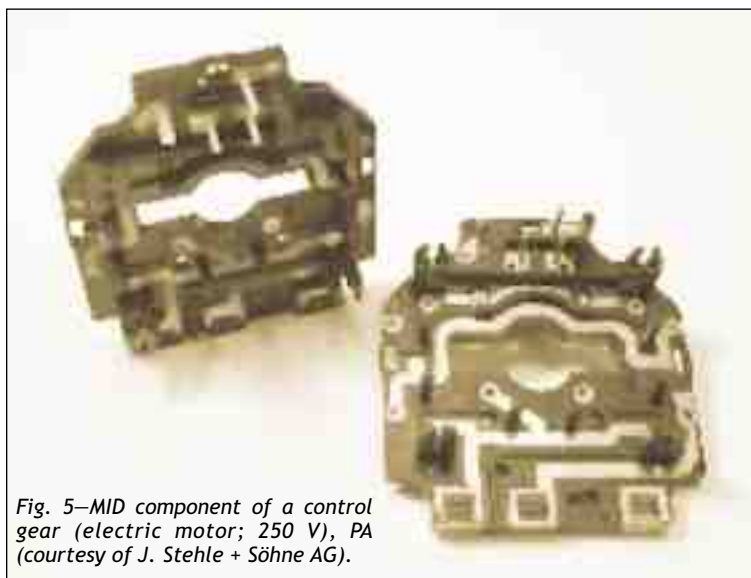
MID component of a control gear (electric motor; 250 V), PA (courtesy of J. Stehle + Söhne AG).
